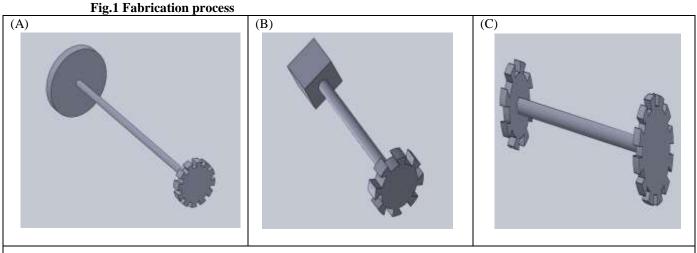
3D Design of shaft with (a) grinding wheel (b) drill chuck (c) cutting wheel
